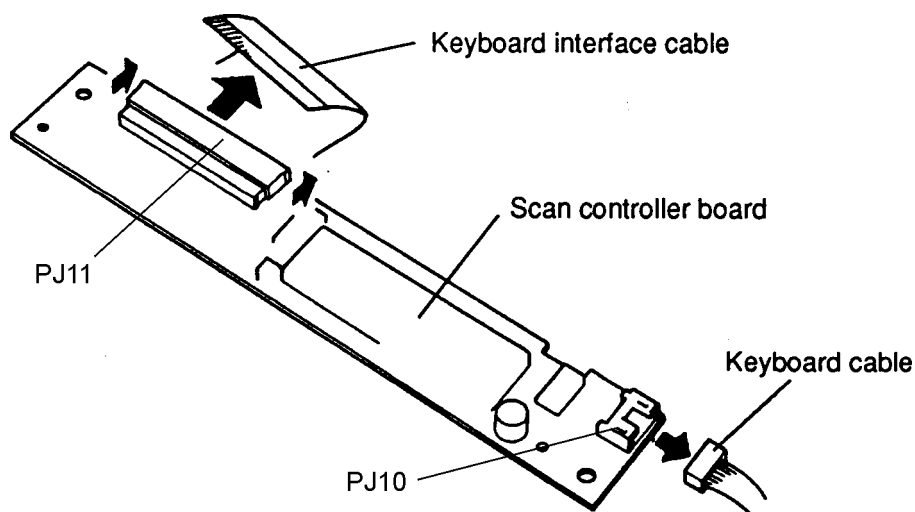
Disconnecting the Keyboard Cable and Keyboard Interface Cable
